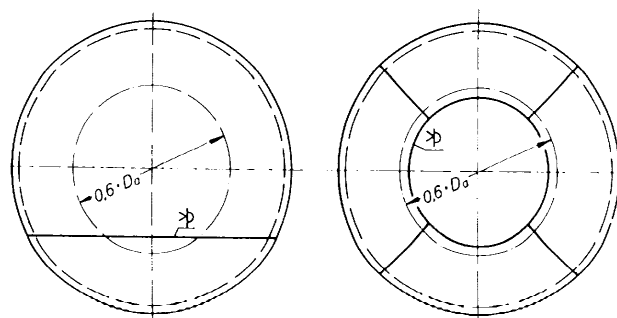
Arrangement of welding seams at dished ends
